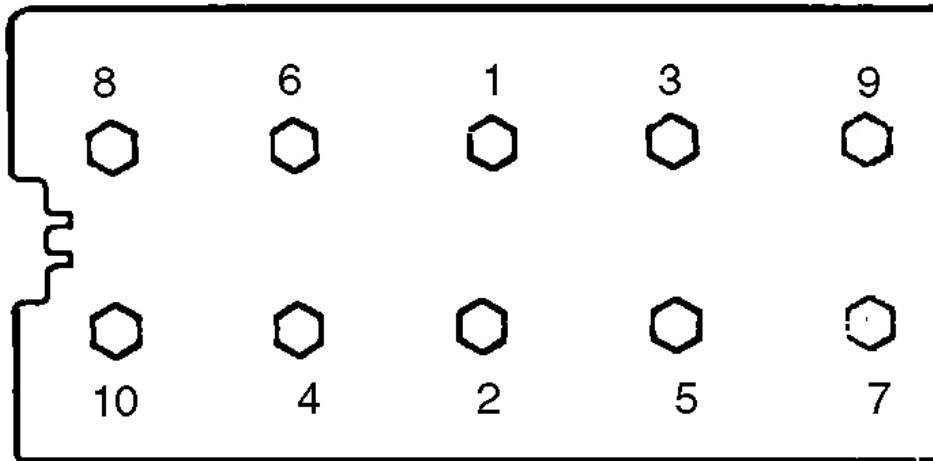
Camshaft Bearing Cap Bolt Tightening Sequence
